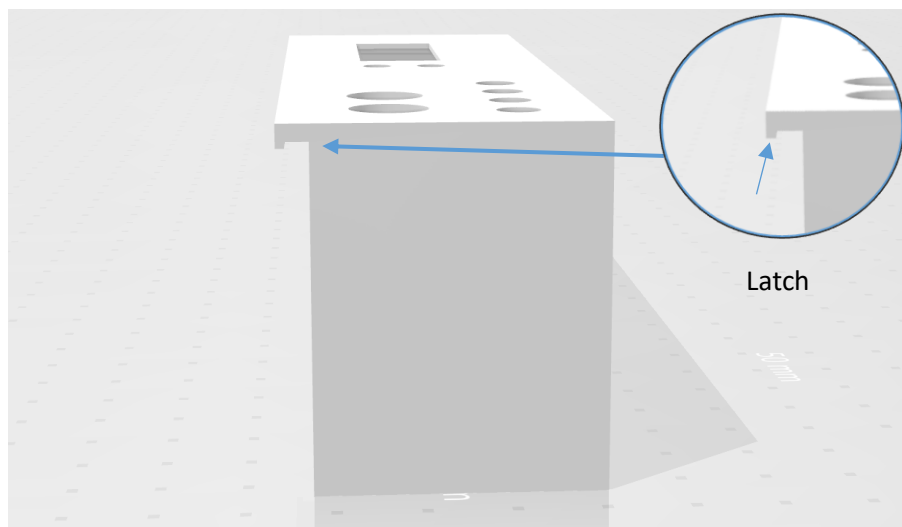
3D model of enclosure, side view showing the integrated latch.
